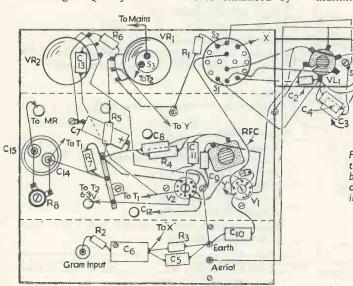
The below chassis layout. In this diagram the front and rear aprons (together with the bracket for  $VL_1$ ) are shown flat for reasons of clarity. The tag marked "S" in this diagram (and in Fig. 2) is a stand-off anchor tag. The side aprons of the chassis are not shown here
